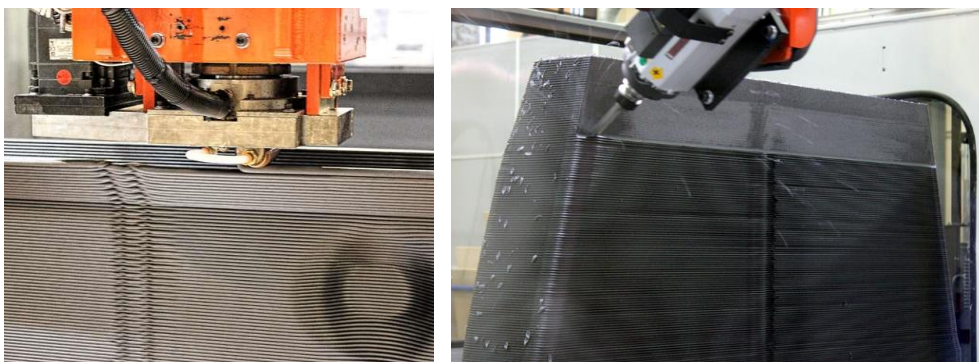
A close-up of the printing and trimming process. The very large bead dimension can be noted. [84]-[34]
